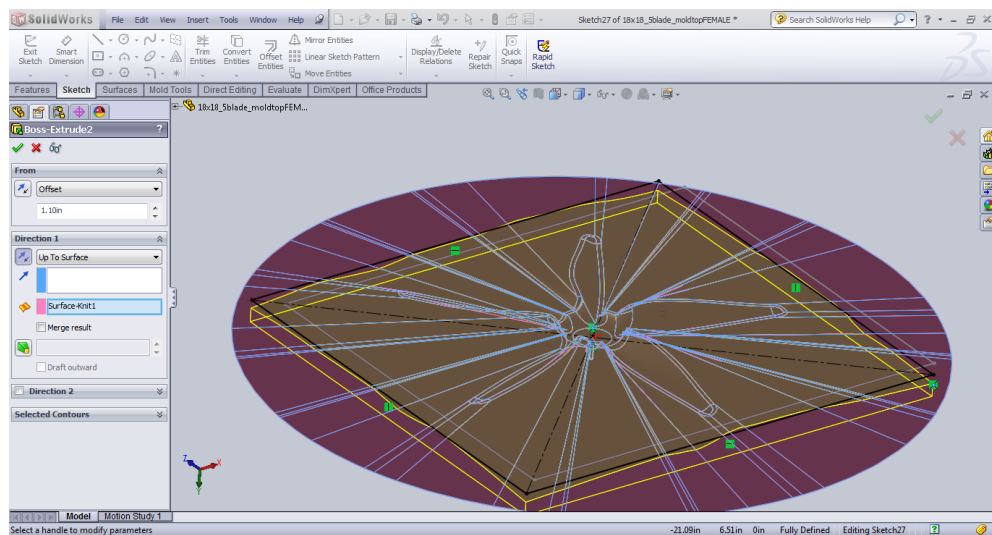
Parting Surface of 5-bladed propeller in SolidWorks
